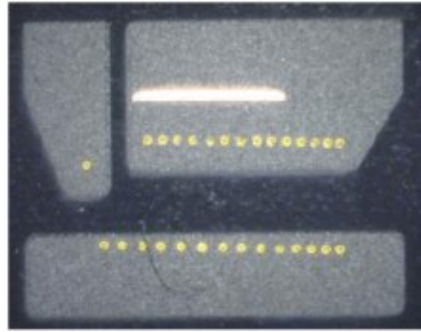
PLATEABLE MOLD PACKAGE FOR LOWEST R_{DSon}
